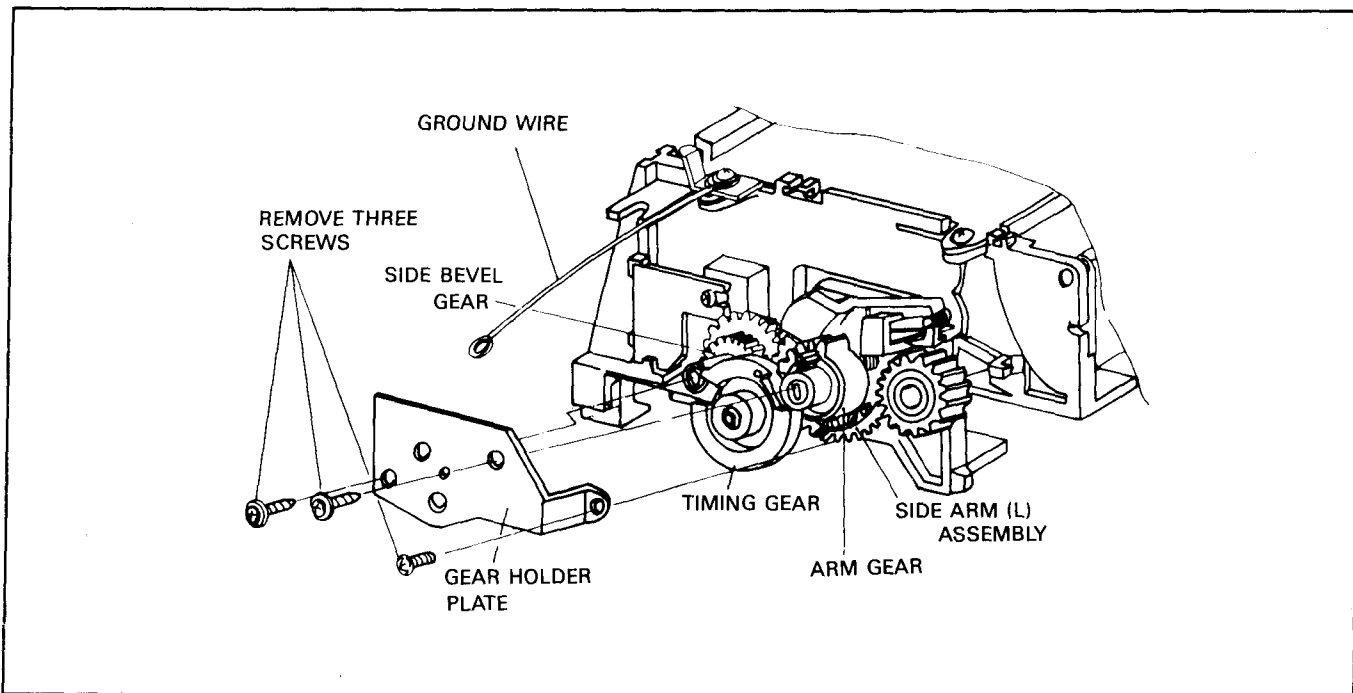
Timing Gear/Side Arm (L) Assembly/Side Bevel Gear Removal
